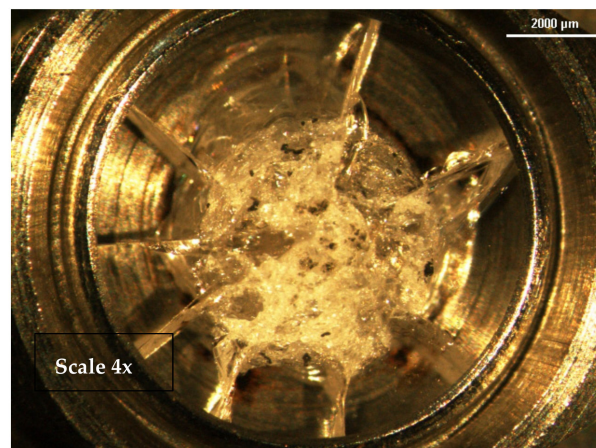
Lower JB on z axis after the test, AISI 316 spindle.
